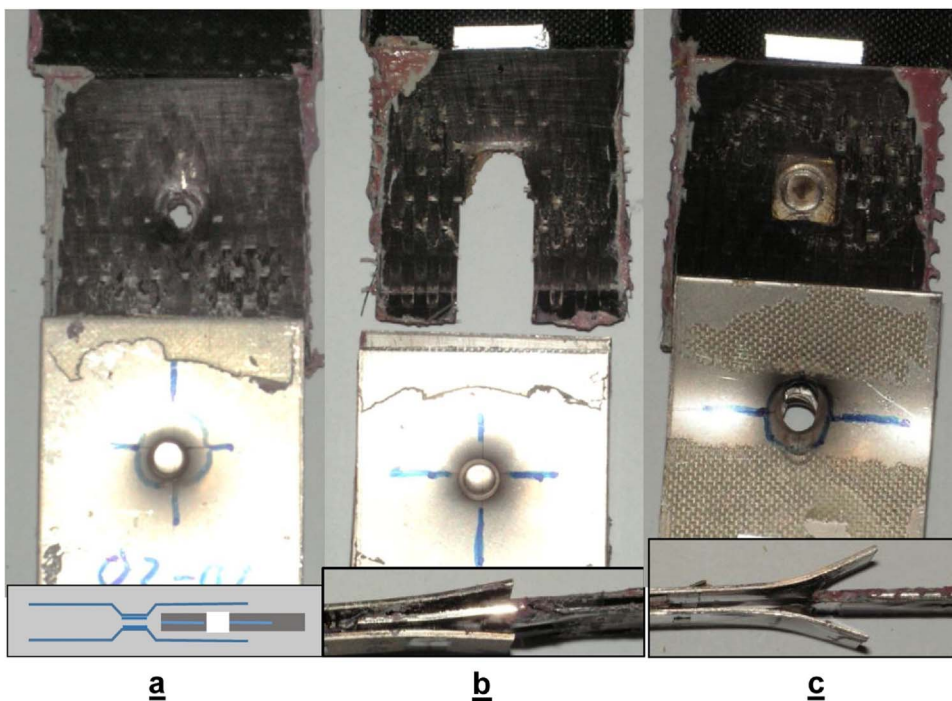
Photographs of failure for bonded/welded joints (inset illustrates edge perspective of joint failure): (a) weld (fibres) and adhesive; (b) weld (no fibres) and adhesive, composite shear out failure, and weld remained intact; (c) weld (no fibres) and adhesive, weld nugget torn from steel adherends.
